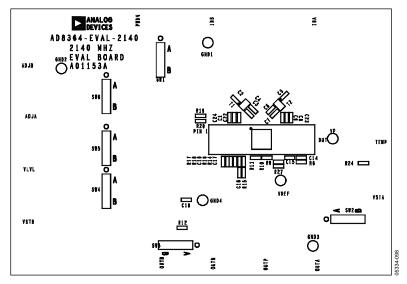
AD8364-EVAL-2140 Assembly Drawing
